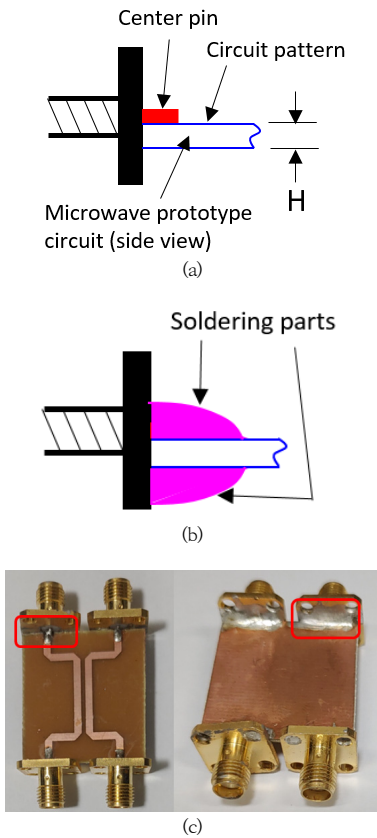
Concept of the soldering between a RF connector and prototype circuit (a)side view (b)soldering parts (c)practical example of soldering for RF connectors
